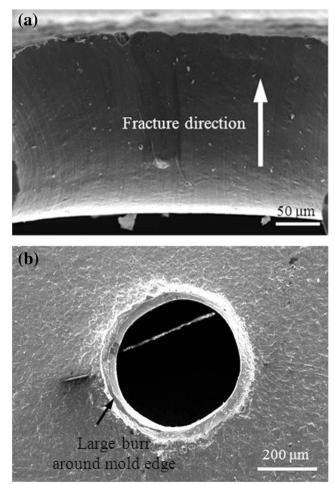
SEM images of punched hole from multiple flyer impacts for 200- $\mu$ m-thick workpiece, 300- $\mu$ m-thick flyer, and 600- $\mu$ m mold diameter: a punched surface and b bottom view with large burr area
